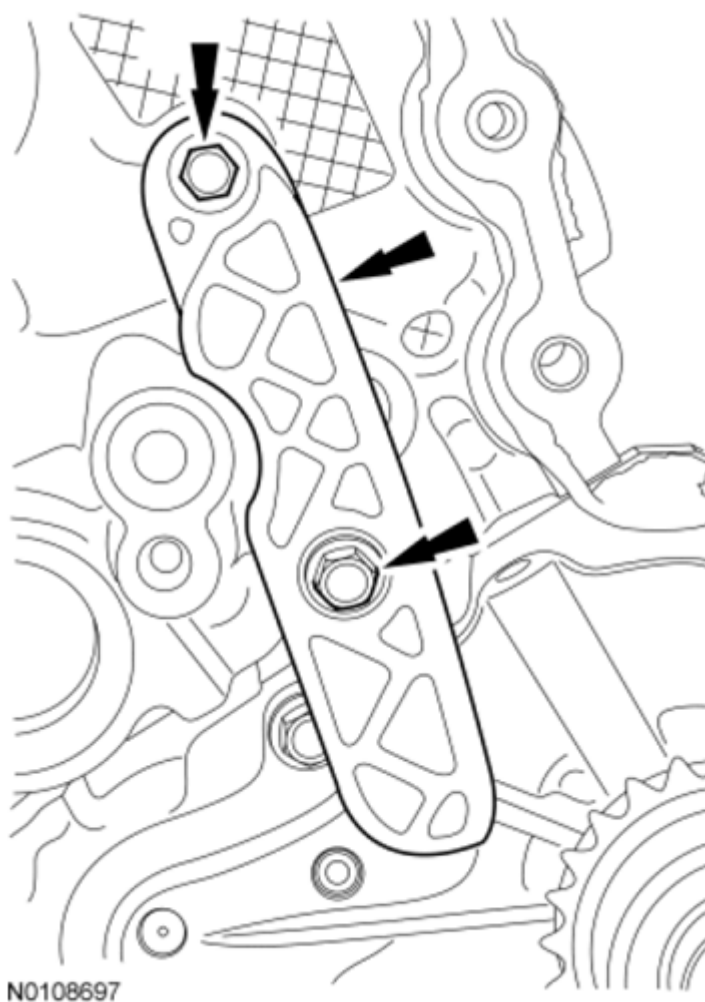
Locating RH Primary Timing Chain Guide And Lower Bolts
